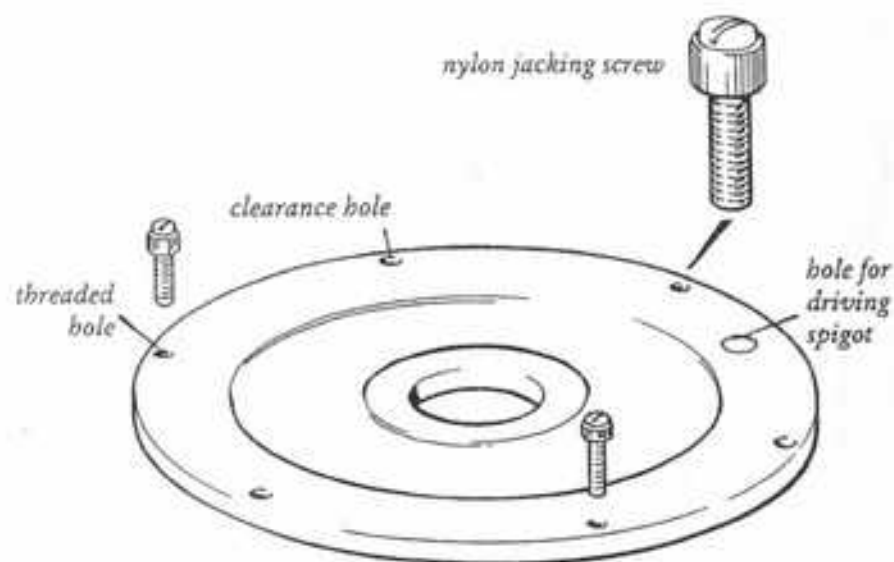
Showing details of the C.300 7" plate. The plate has 6 holes (3 threaded and 3 clearance); the 10" plates have 8 holes (4 threaded, 4 clearance)
